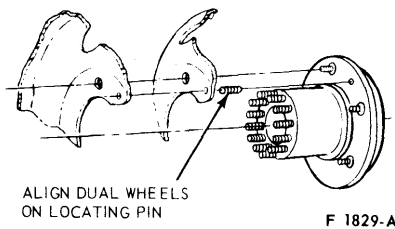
Dual Rear Wheel Radial Alignment to Hub (E-350, F-350)
